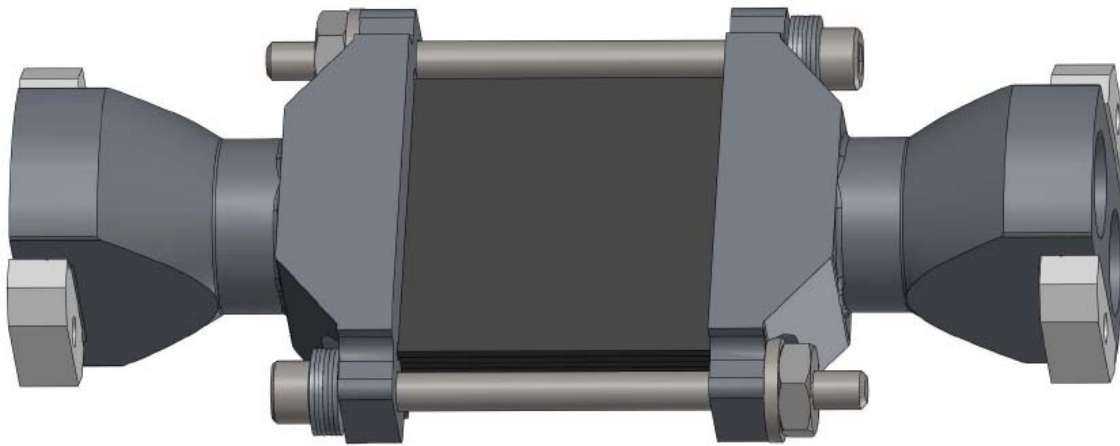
Drawing of the designed combustors connected to the gas distribution manifolds with tension provided by Belleville disc springs (shown on socket-cap-end of 6-32 bolts).
